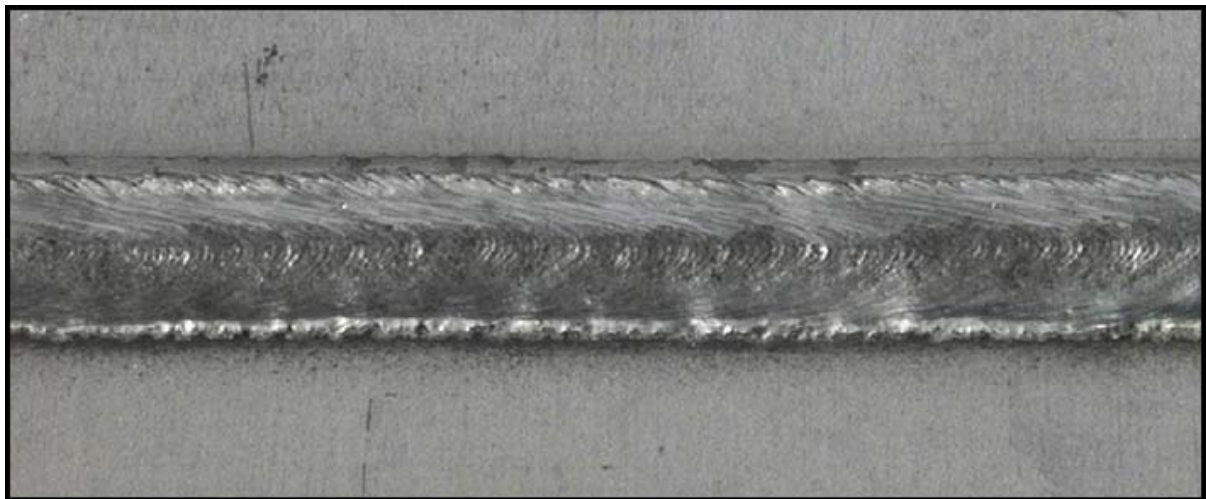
Lap-weld on two 3 mm aluminium sheets; welding speed 165 cm/min
